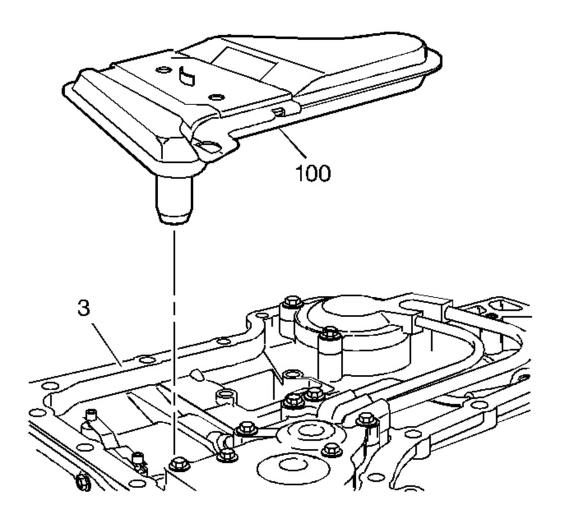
Identifying Oil Filter Assembly Courtesy of GENERAL MOTORS CORP.
